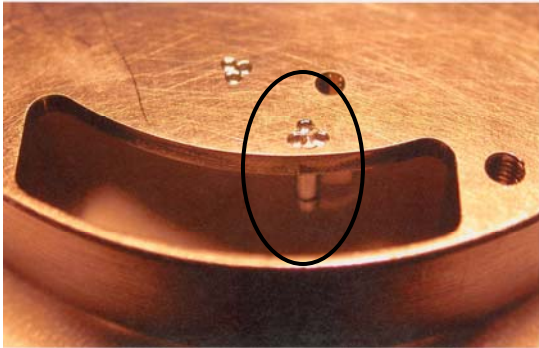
Typical Miniature-Scale Pivot Pin (0.78 mm diameter) Inserted into Its Corresponding Drilled Hole before Being Welded in Three Places
